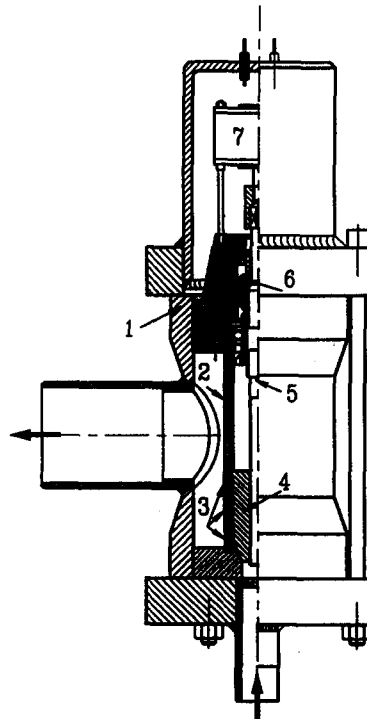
Proposed multi-hole expansion valve with stepping motor: 1, valve housing; 2, cylindrical shell; 3, holes distributed along a spiral; 4, sleeve; 5, screw driving the sleeve; 6, sealing system; 7, stepping motor.
